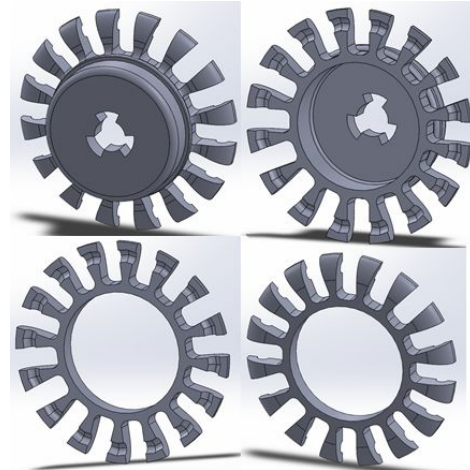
Omniwheel frame design, with cuts in order to fit and connect the motor and the bearing.
